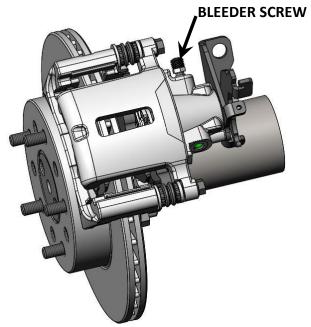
Caliper Installation and Bleeder Screw Orientation
